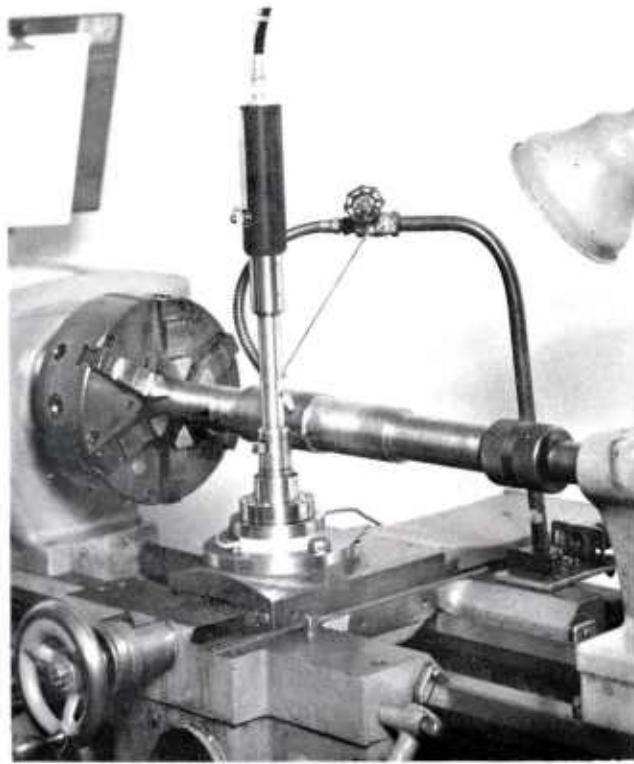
Ultrasonic tool posts mounted on conventional lathes.
